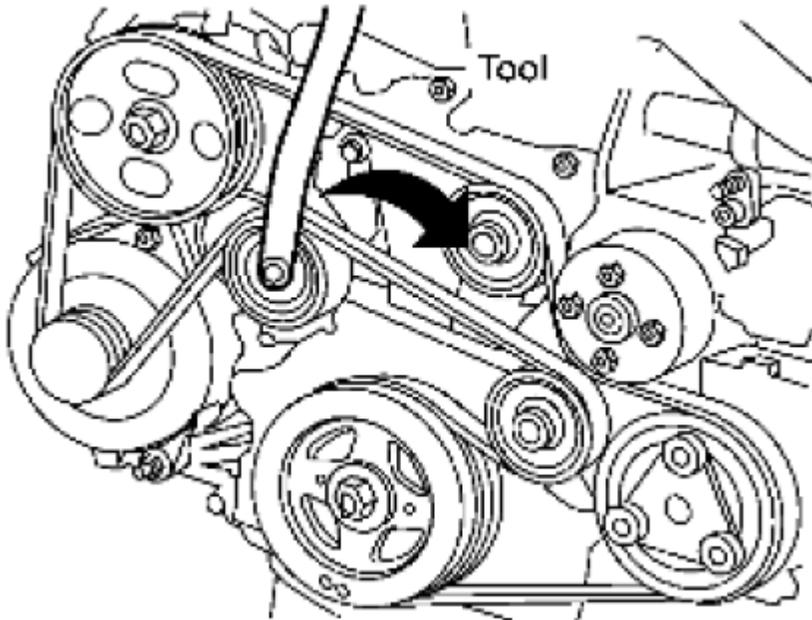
Moving Tool On Auto Tensioner Pulley Bolt
